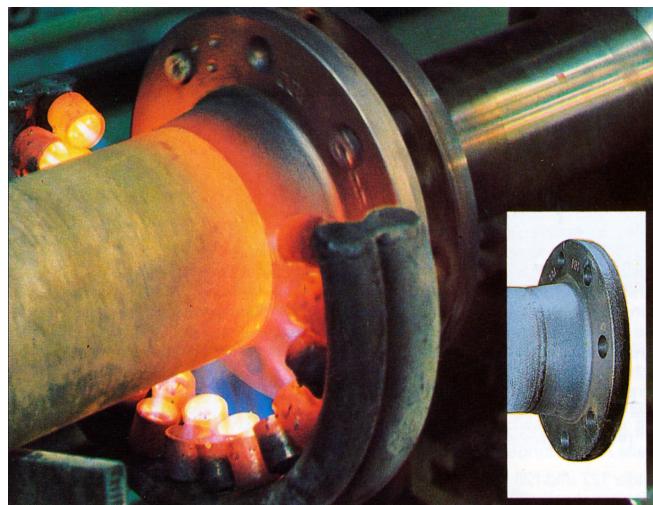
Plasma welded joint between a centrifugal casting tube and a spheroidal graphite cast iron (JS) flange
